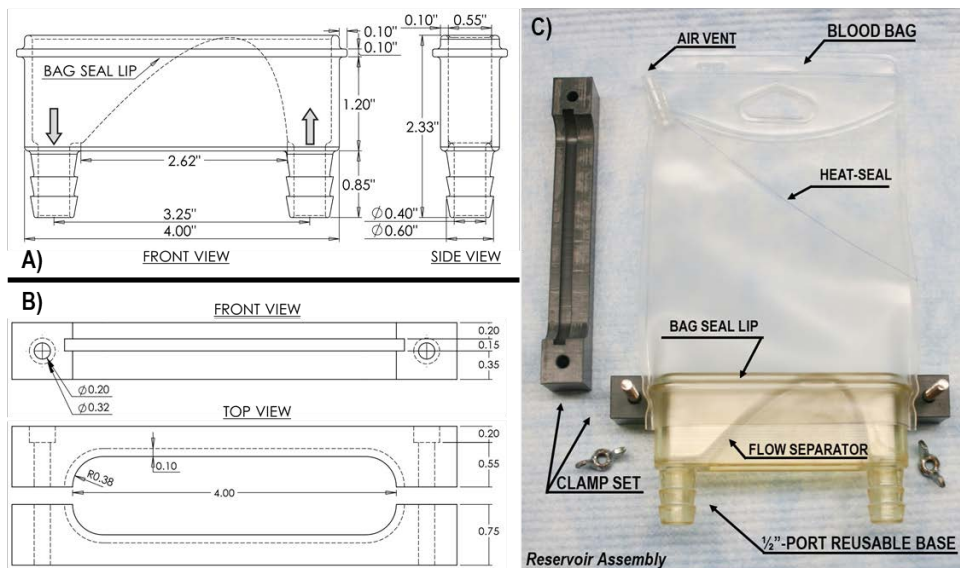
Schematic of the reusable 1/2”-port A) printed base, B) machined clamp set, and C) the manufactured reservoir components with the modified blood bag before assembly.
